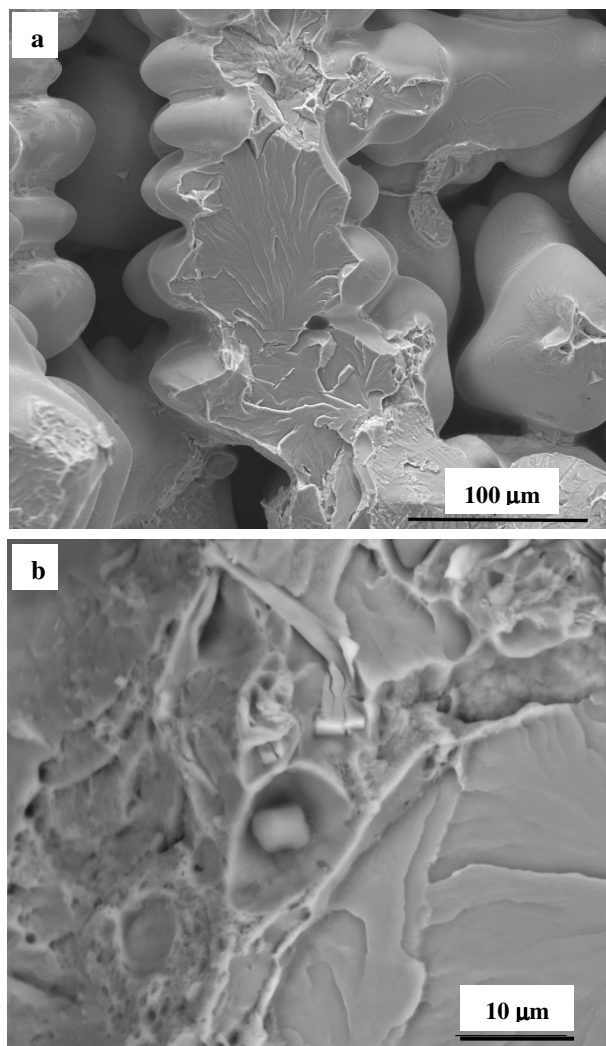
Fracture surface of samples taken from centerline zone of continuous casting slab. a) Brittle fracture, b) Combination of ductile and brittle fracture modes.
